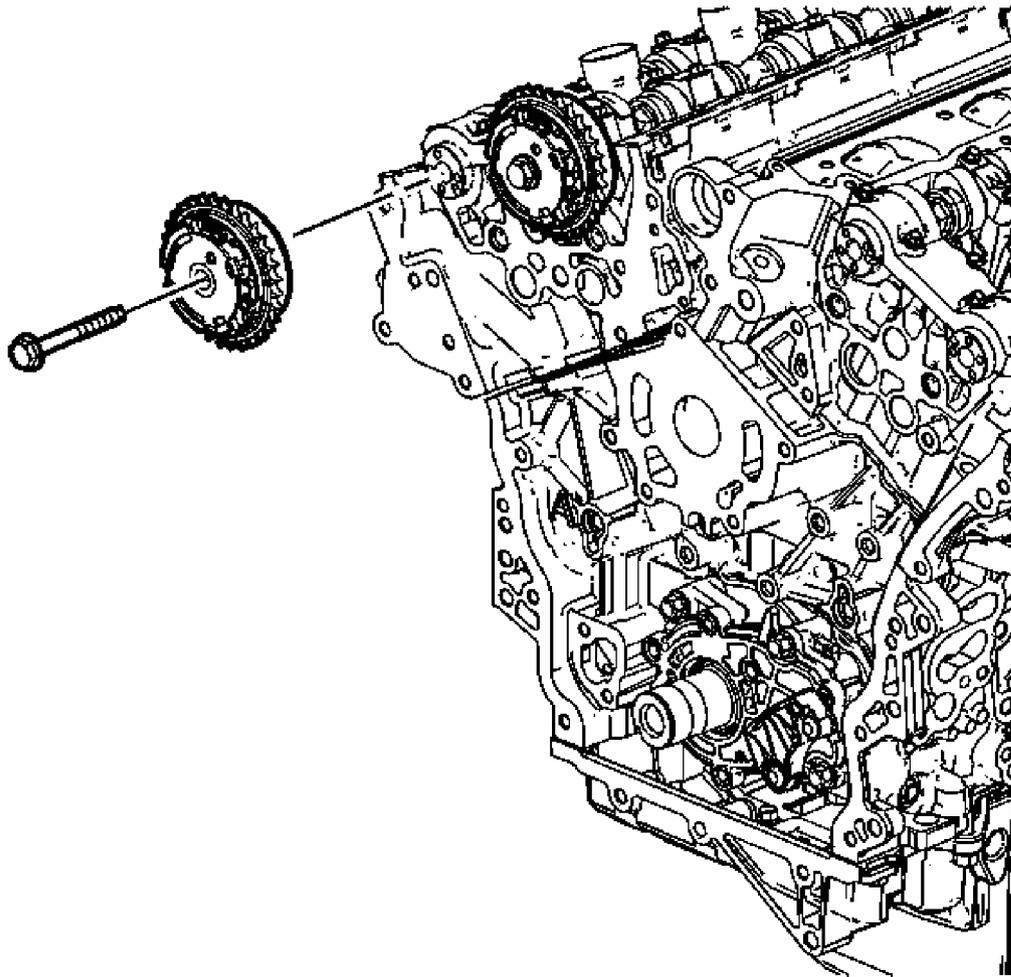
View Of Right Exhaust Camshaft Position Actuator
